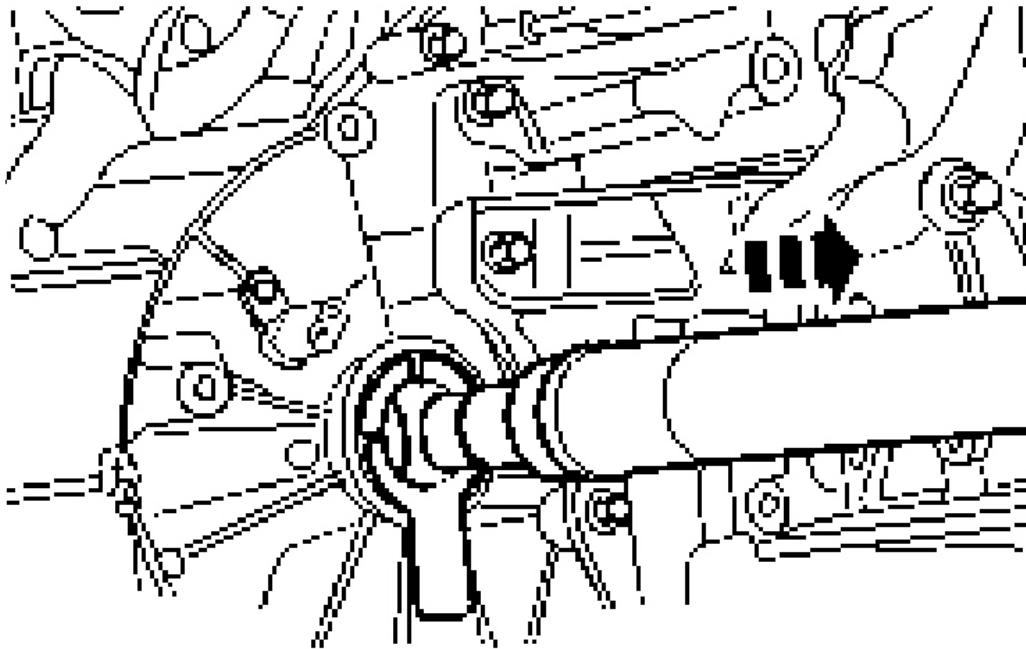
Removing Intermediate Shaft Center Bearing Cap
